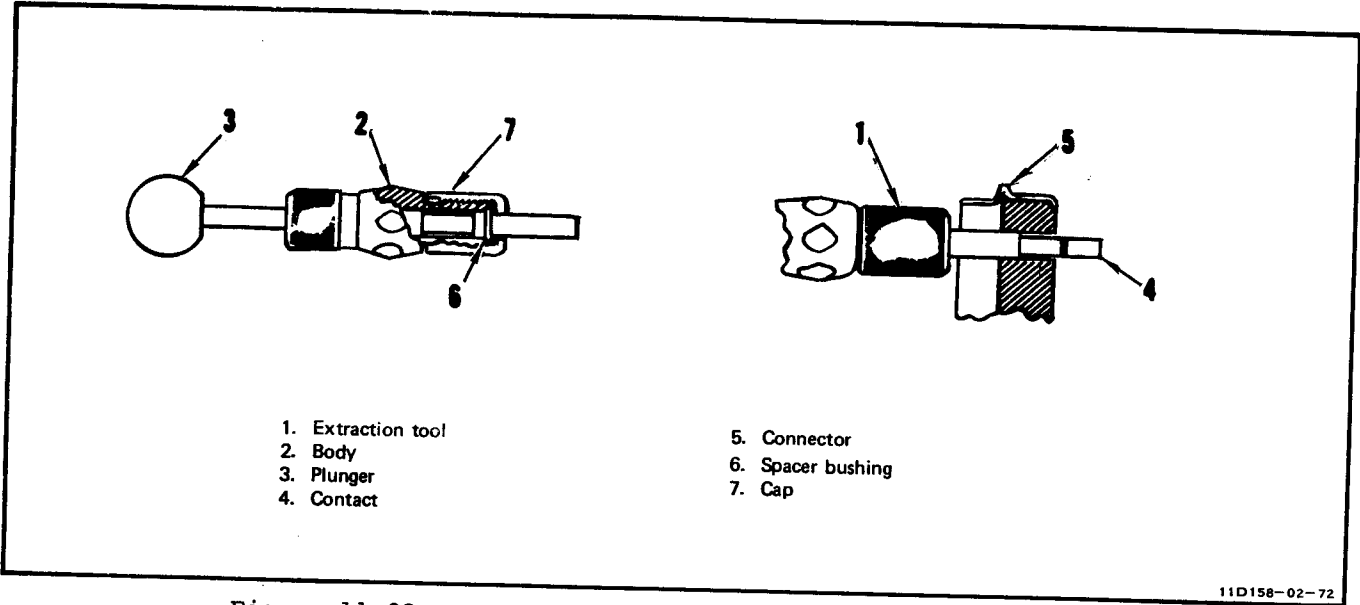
Extraction Tool for DM53742-5004 Connector
